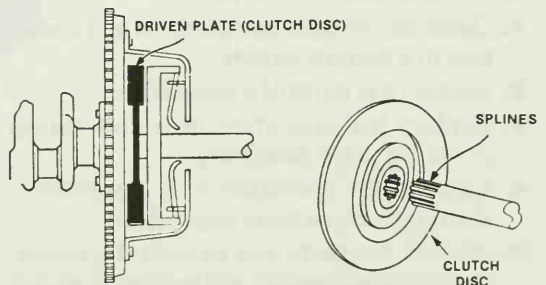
The driven member in the clutch fits between the pressure plate and the flywheel on a splined shaft. (General Motors Corporation)
